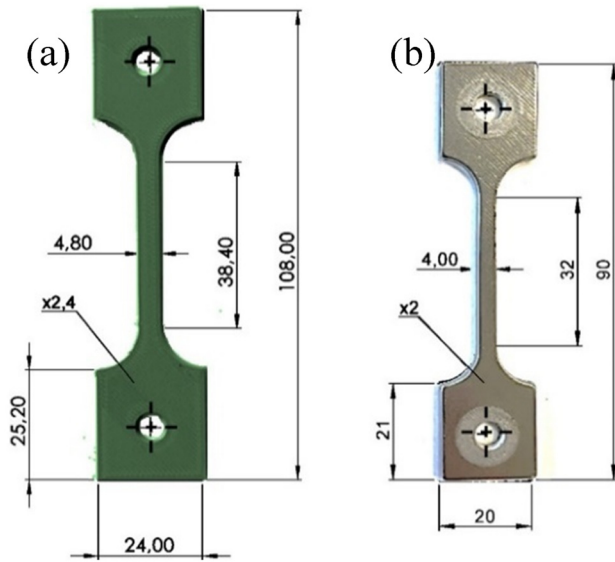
AM 316L specimen: (a) printed part and (b) final part after sintering.
